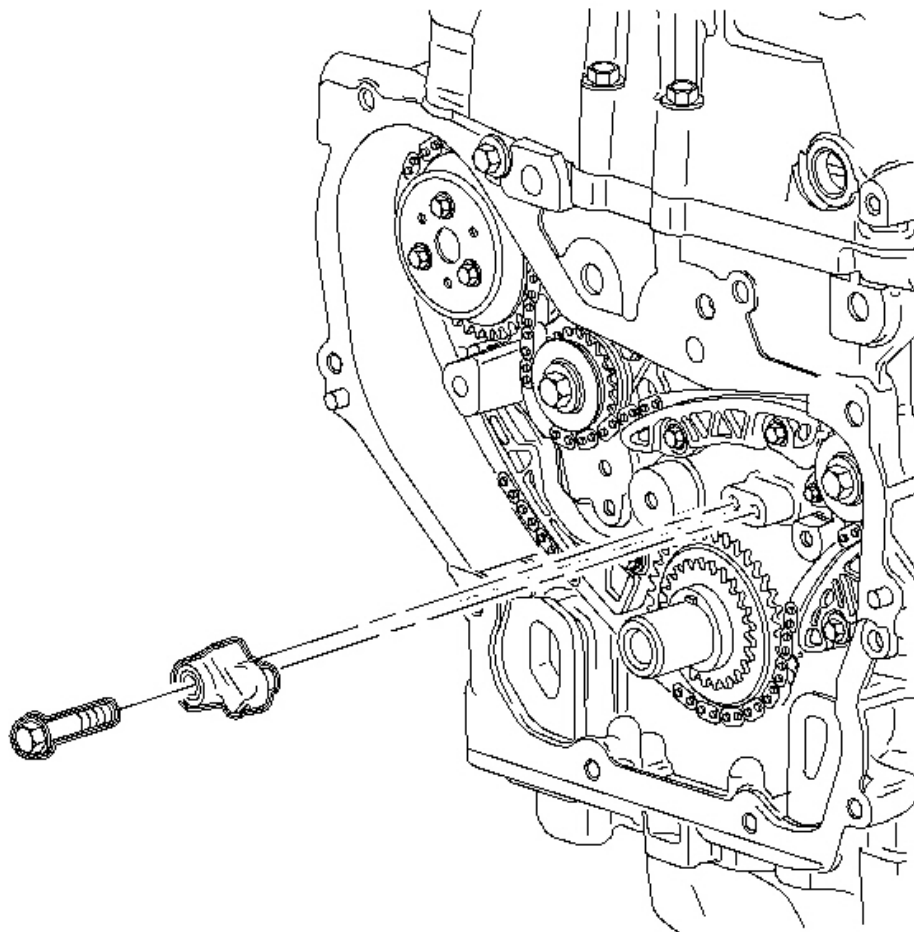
Removing/Installing Timing Chain Oiling Nozzle & Bolt
